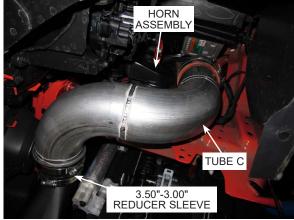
j: Tube C Installation (Oil Cooler Removed For Clarity)
